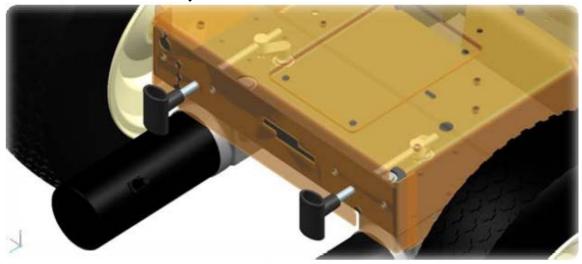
A – Example of chassis extension with motors mounted. Reprinted with Masato Hayashi's permission.
